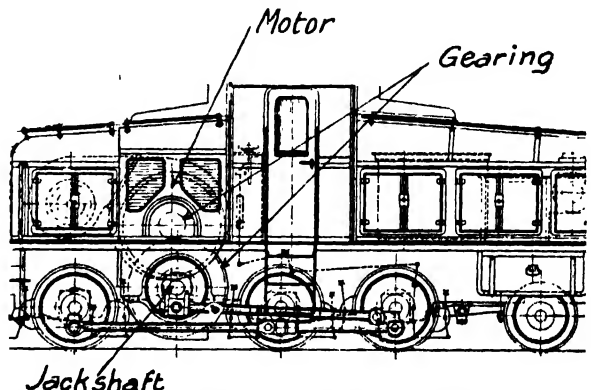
Collective drive with horizontal connecting rods. This form is alternative to "Scotch Yoke."
